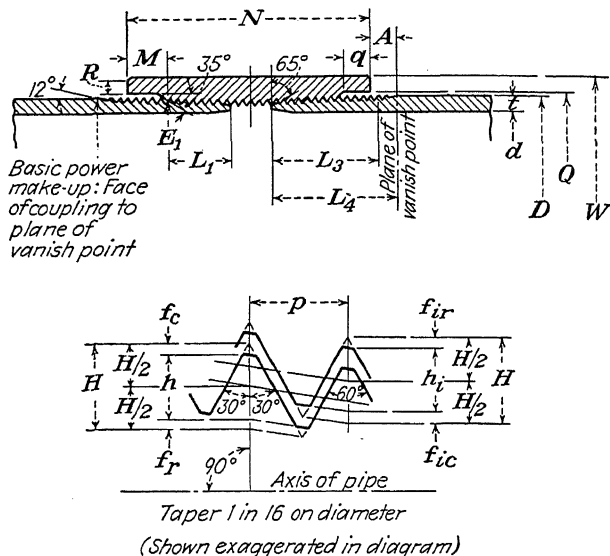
API standard 5L threaded line pipe, hand-tight assembly.
